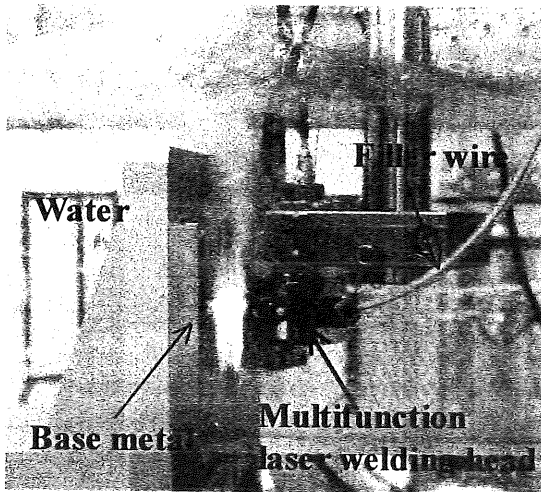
Under water laser welding with multifunction laser welding head
